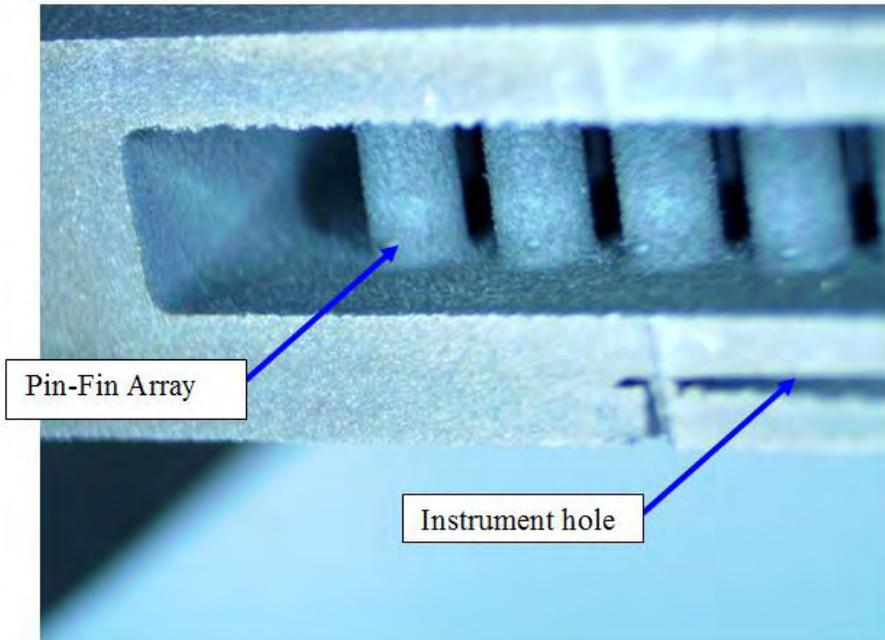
Close-up of pin-fin array and instrument hole from wire cut segment of 2013 prototype.
